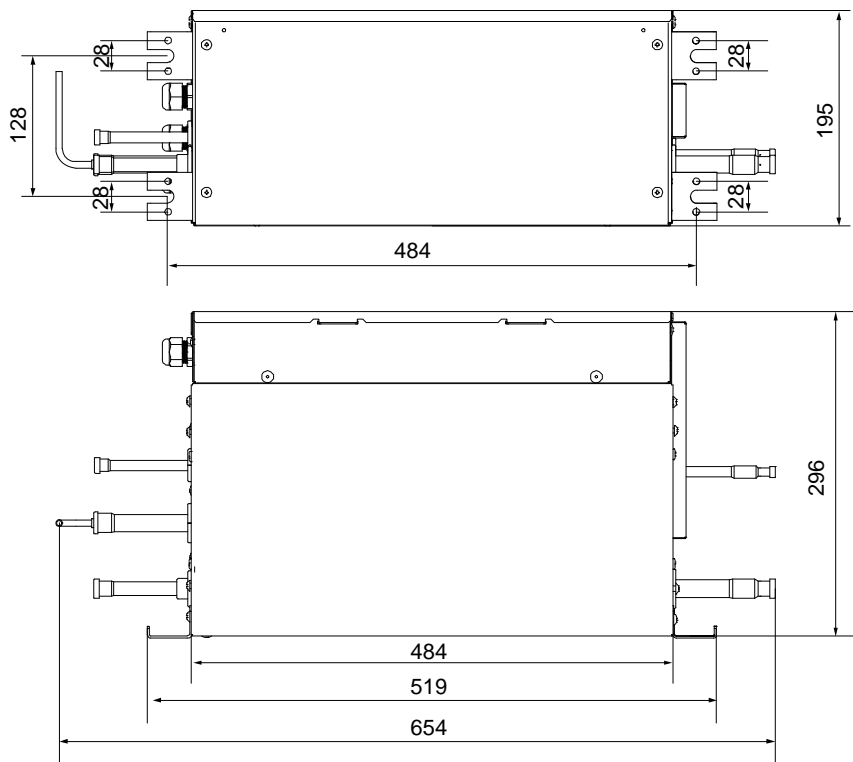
Ceiling-suspended type MS01 dimensions (unit: mm)
